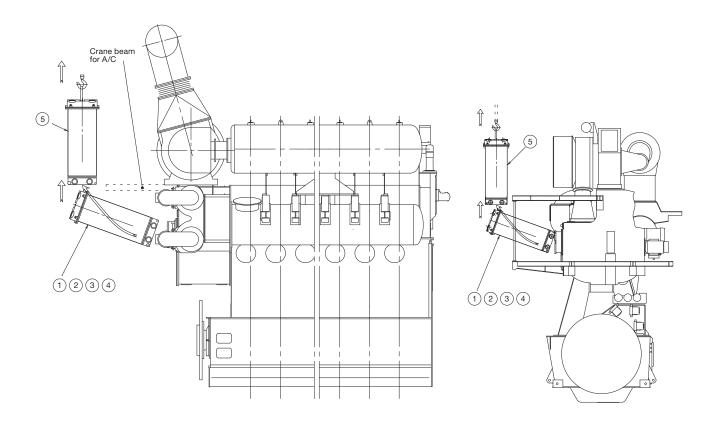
Crane beam for overhaul of air cooler, turbocharger located on aft end of the engine
